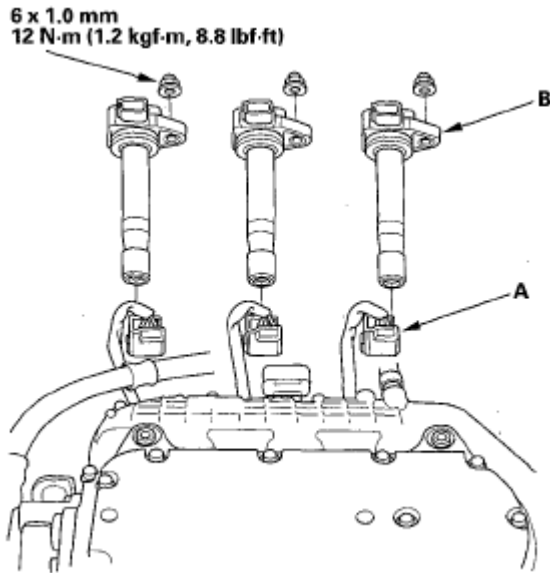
Identifying Ignition Coil Connectors And Rear Bank Ignition Coils
